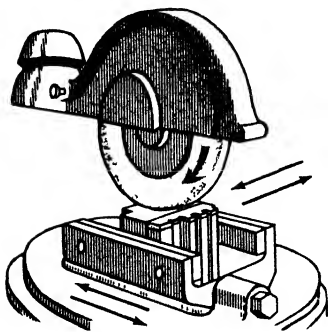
Sharpening a Straight, Dovetail Forming Tool
